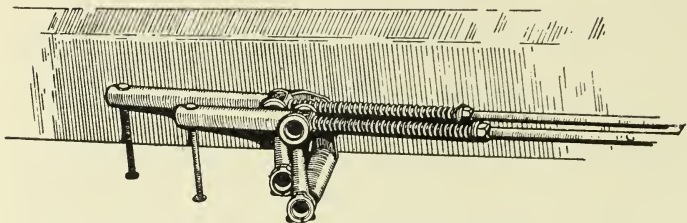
OUTSIDE BRAKE ADJUSTMENT
